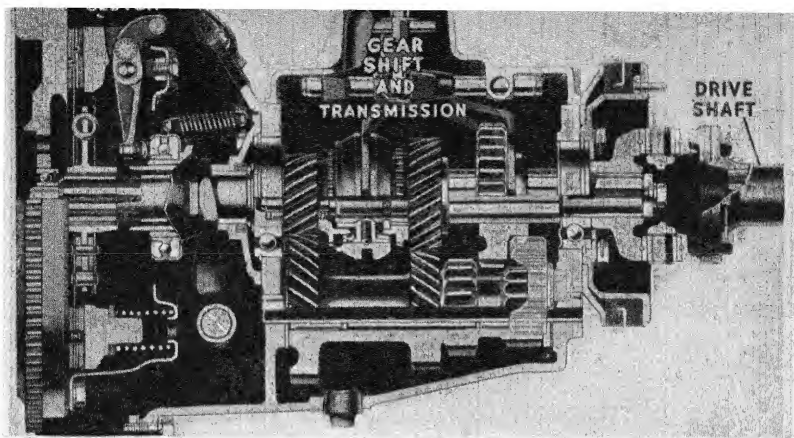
A cutaway view of the clutch and transmission gears of an automobile (Ford Motor Co. photo)
